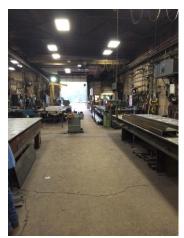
Plate & Miscellaneous Steel Fabrication Shop
